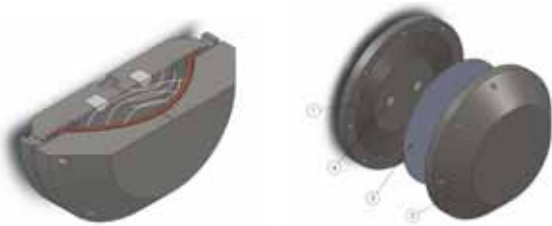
3D design of the sheet deforming mould through hydroformation.
